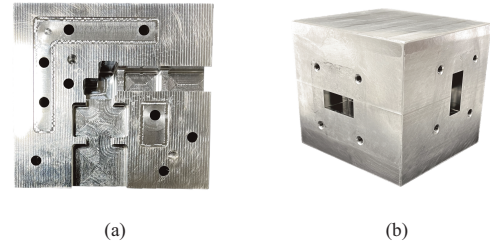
Fabricated X-band prototype; (a) The internal filter cavities of one half section, and (b) the fully assembled filter.
